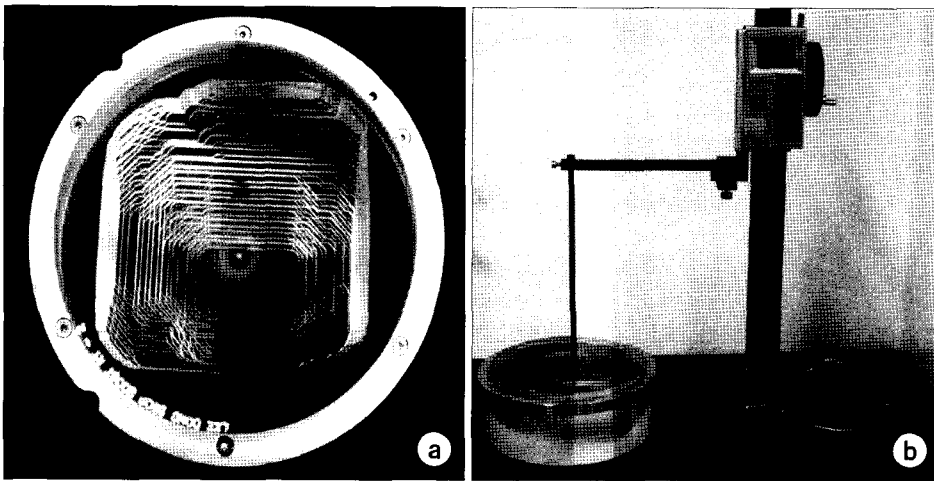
(a) Compensator for proton therapy is consists of PMMA material to generate 3 dimensional tumor shape by milling machine. (b) Current QA system using modified digital calipers, needle were used. The QA method is depth measurement at several positions of a compensator with depth information of radiation therapy plan system (Eclipse 8.1).
